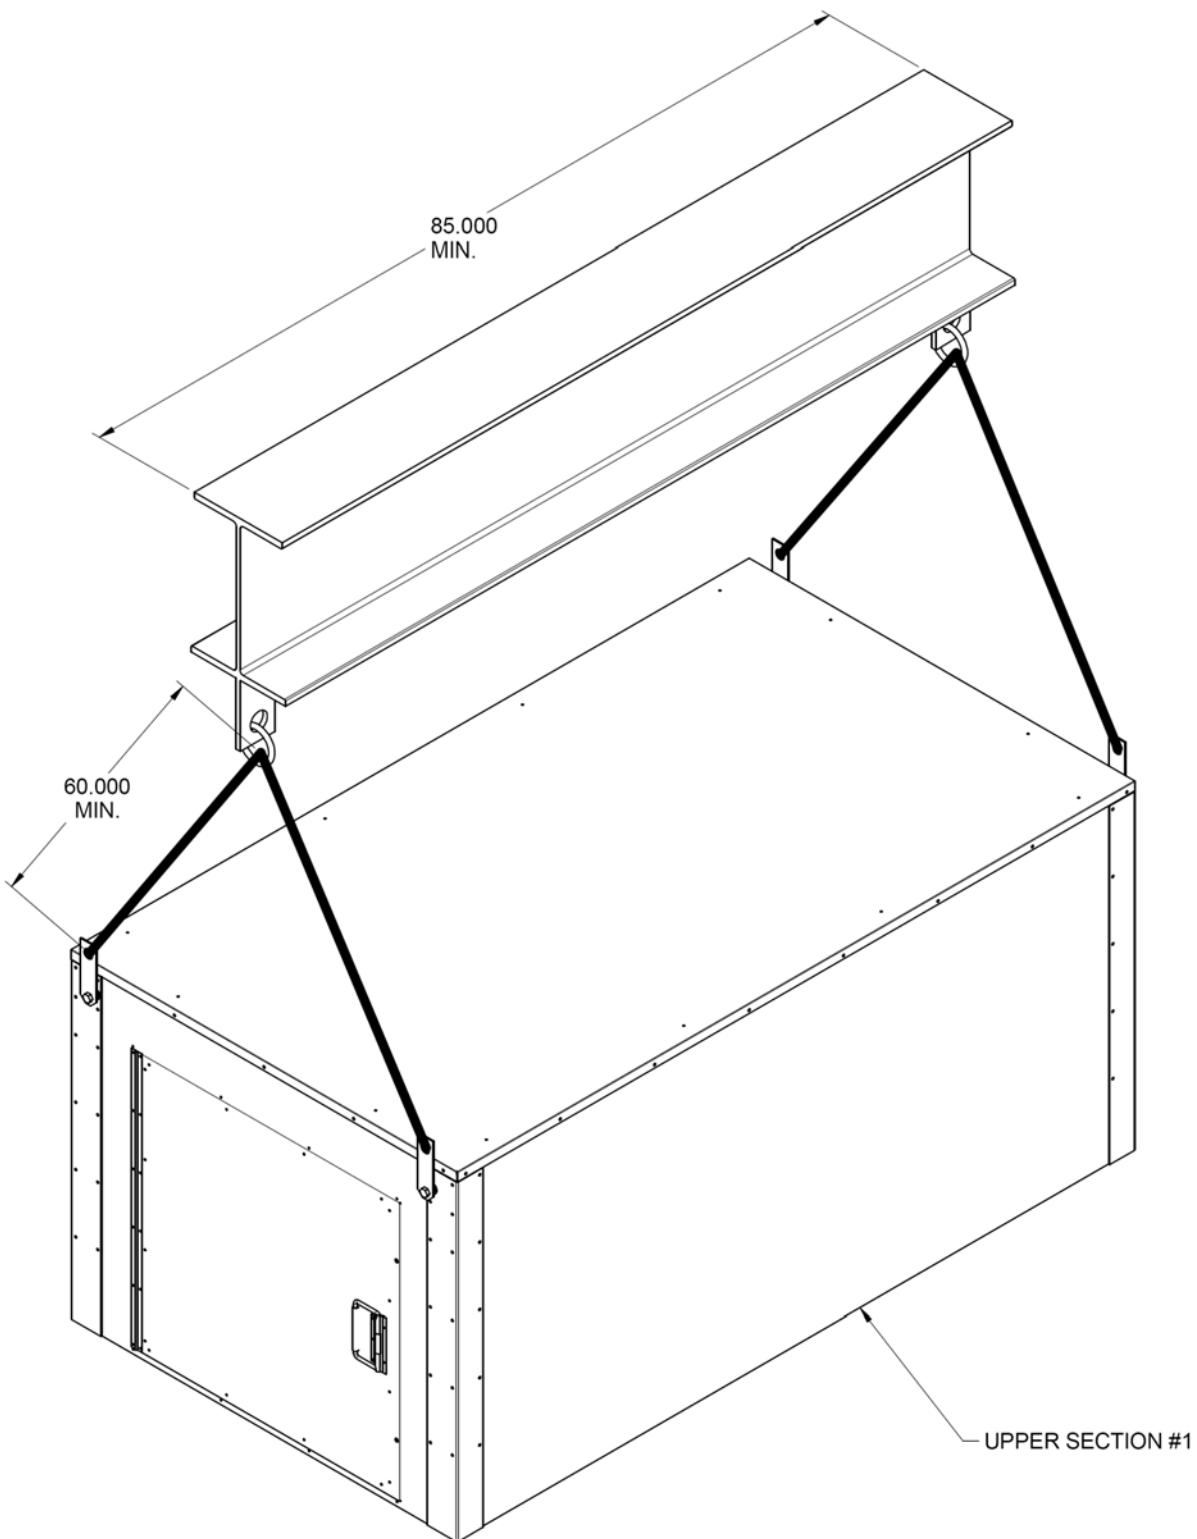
Two Piece Single Unit Fan Section Lifting Details
